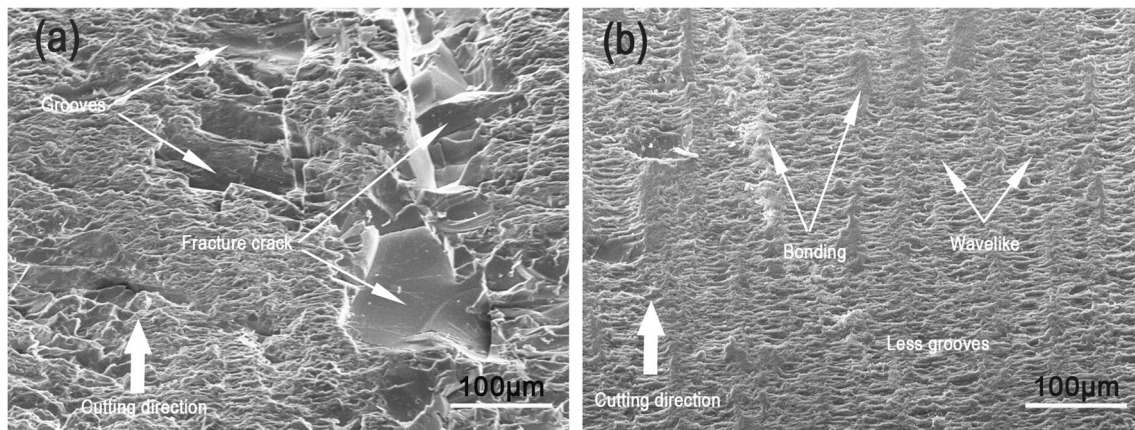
SEM image of workpiece surface during a conventional machining and b LAM
